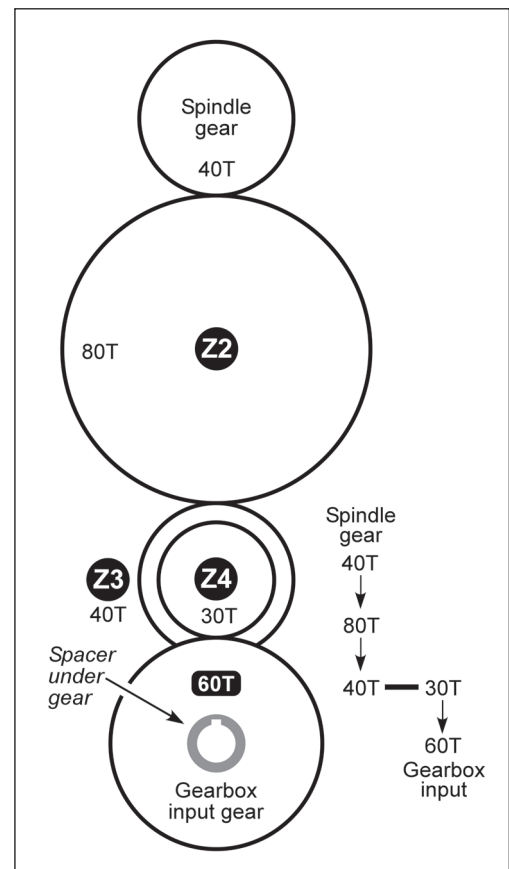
Example setup for U.S. threads With this gear configuration, the gearbox A-B-C lever selects (B) 8TPI, (A) 16TPI, and (C) 32 TPI
